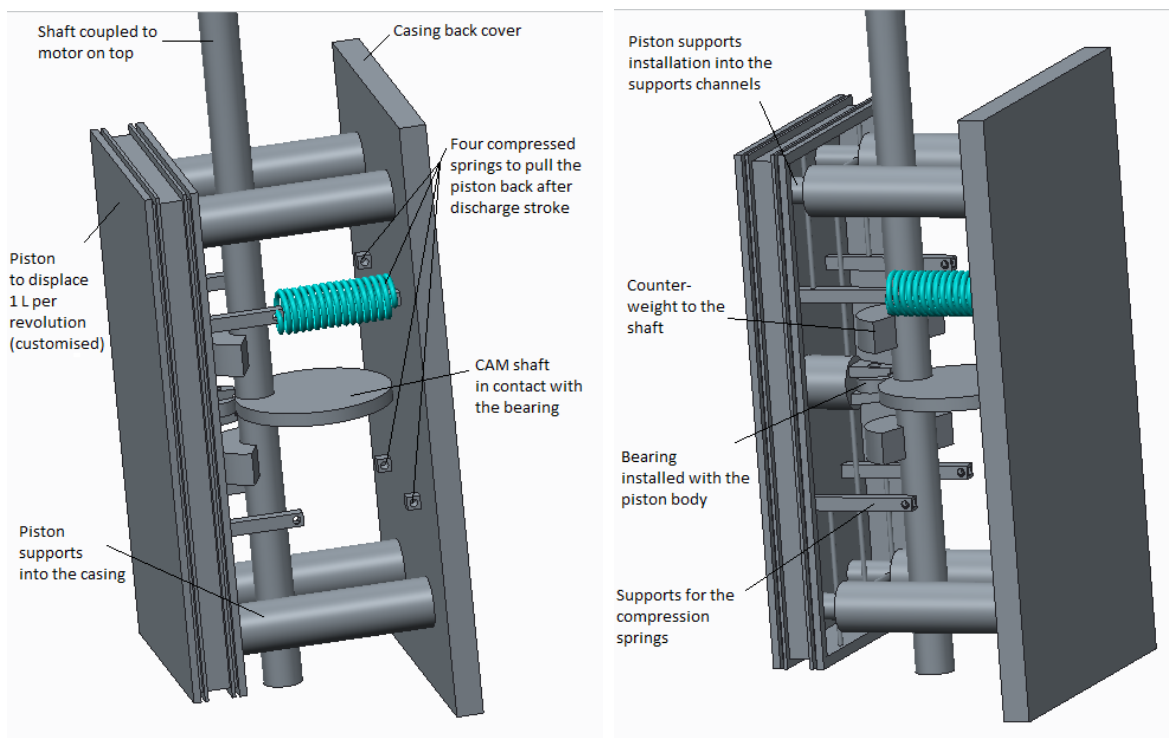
Cam mechanism with piston, shaft and casing back cover.
